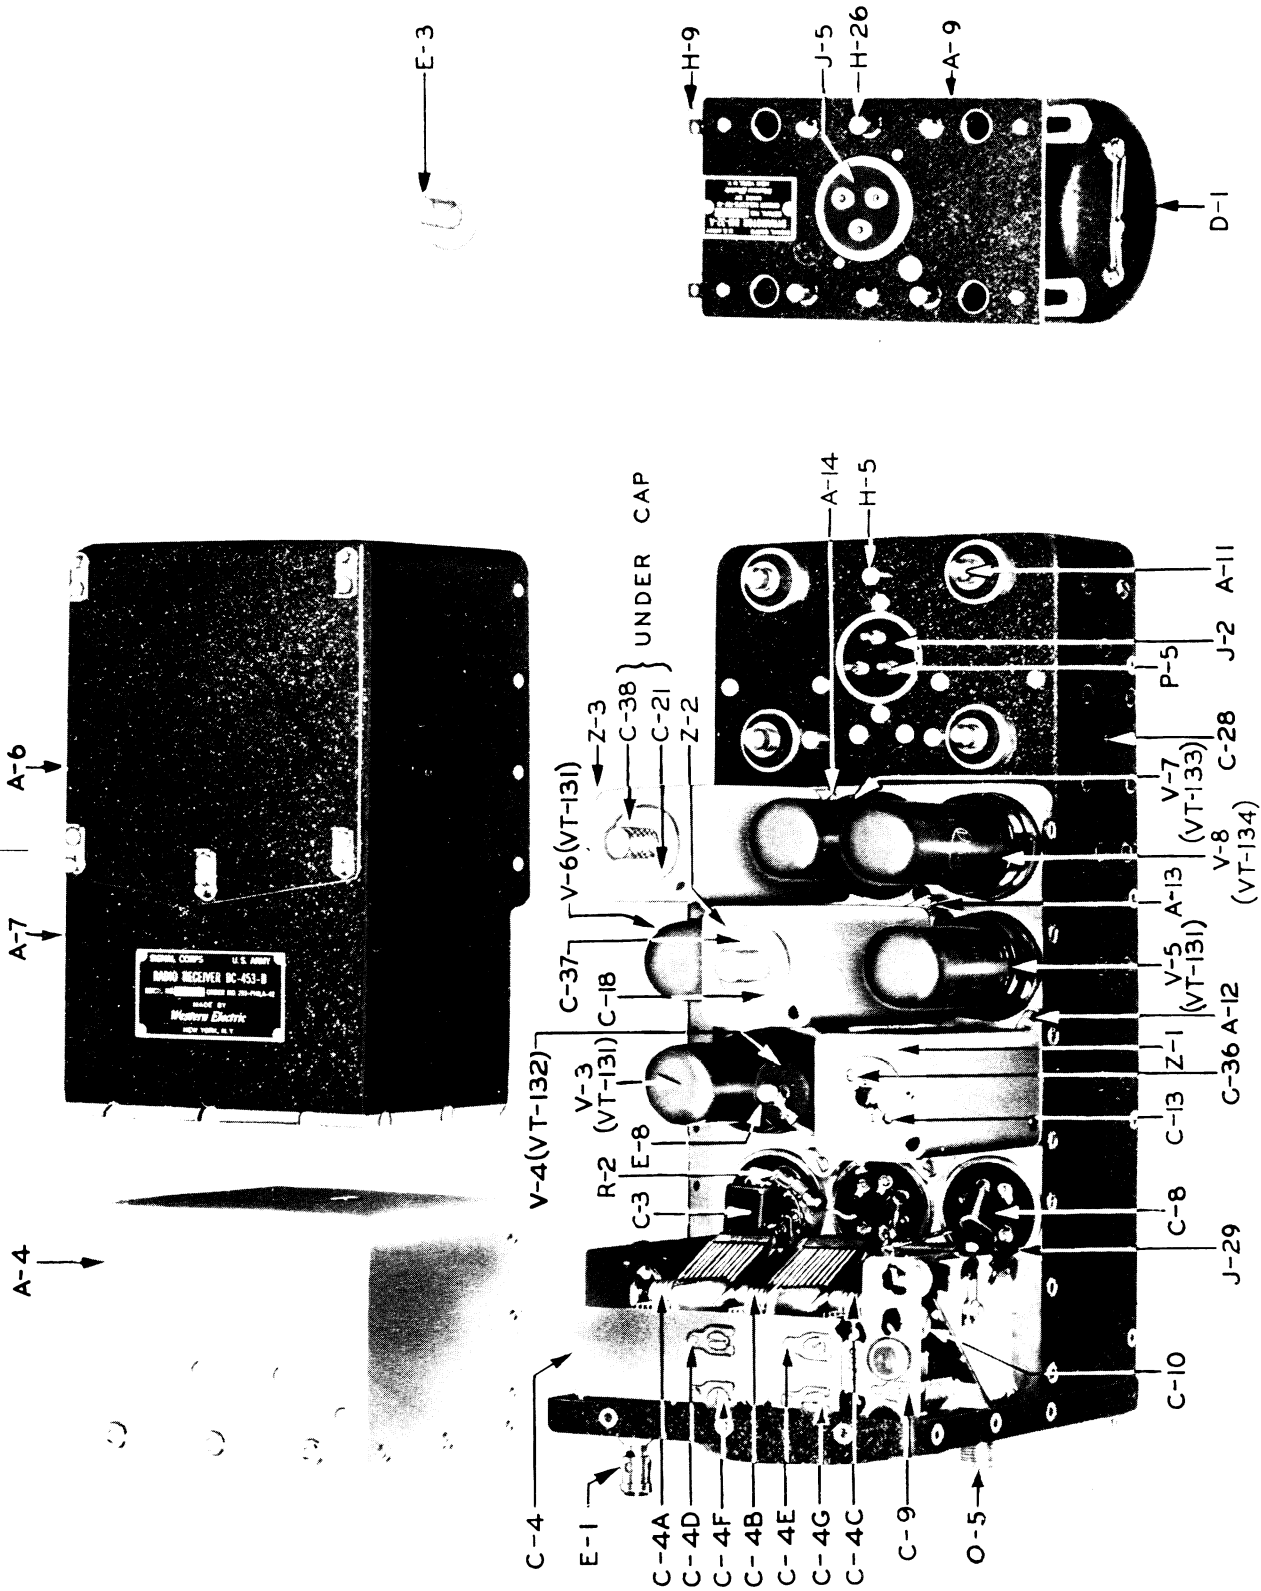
TYPICAL RADIO RECEIVER, TOP INSIDE VIEW, AND BOTTOM VIEW OF DYNAMOTOR DM-32-A
